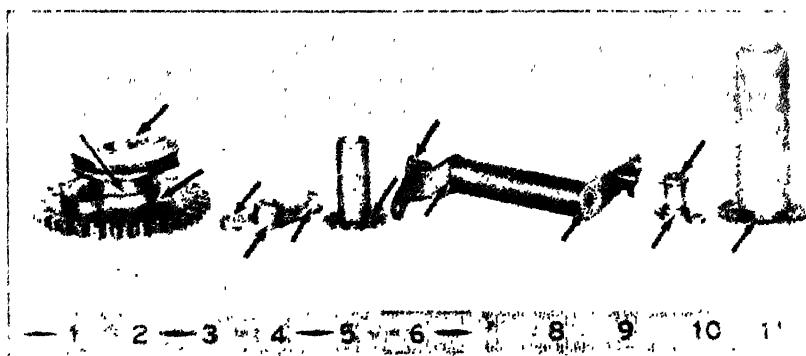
Copper-brazed steel subassemblies for a cash register. Arrows indicate brazed joints.
